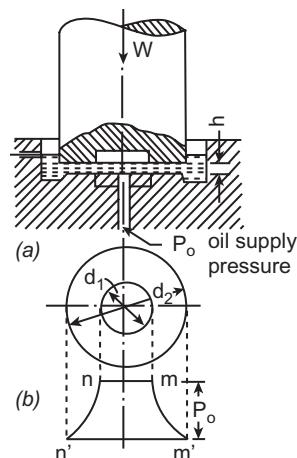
(a) Hydrostatic step bearing; (b) plan view and general character of pressure distribution along diameter of the bearing.
